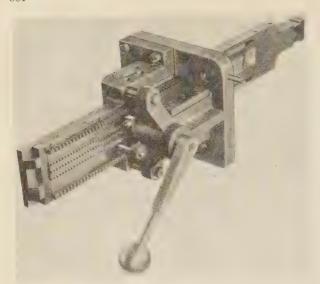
Insert-Type Broach With Simple, Quick-Acting Fixture for Use in a Horizontal-Type Broaching Machine
